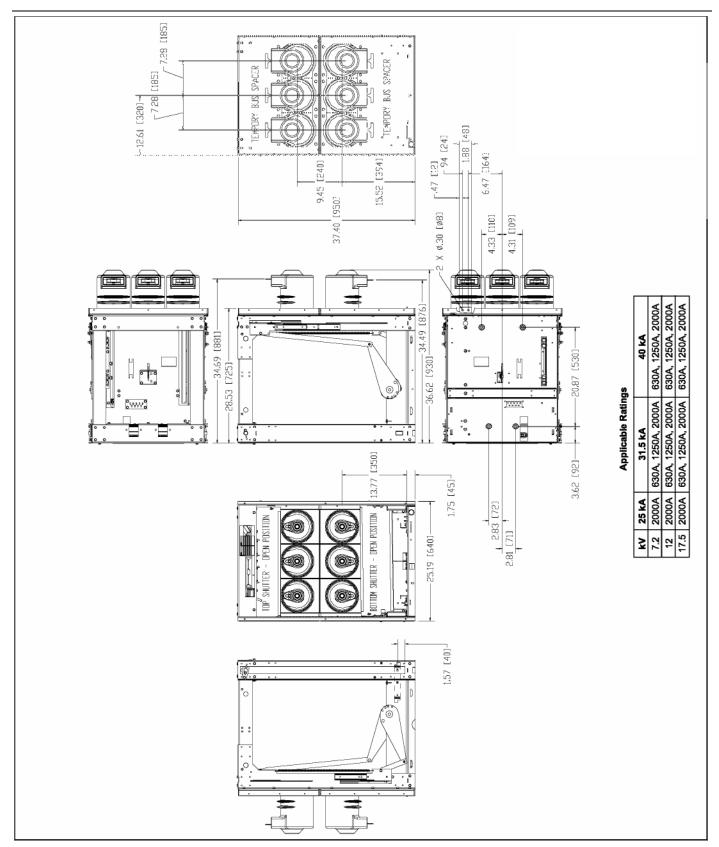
T-VAC Breaker Cassette Outlines in inches [mm] (Refer to above Applicable Ratings Table)
